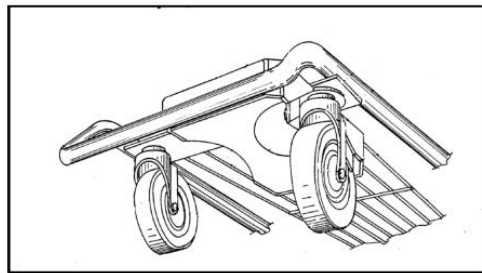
Bottom view of the design by Larry W. Goldstein [3]
